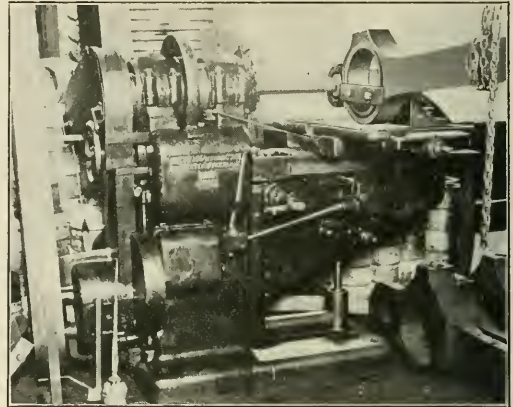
Planetary Internal Grinder Truing Side Rod Knuckle Pin Hole
